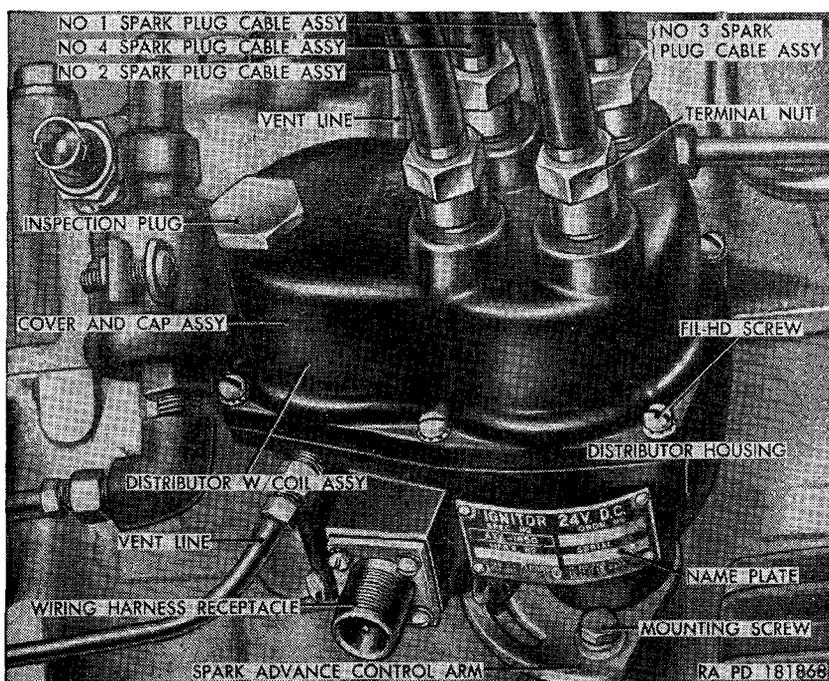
Distributor with coil assembly—installed—wiring harness removed.
